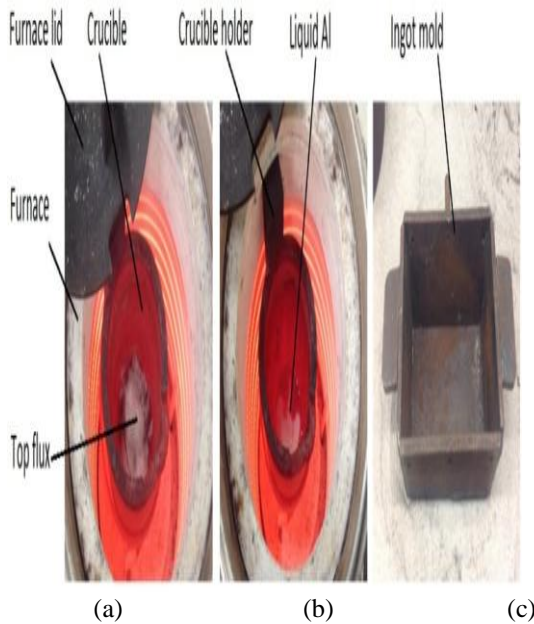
(a) melt mixture of the flux and chips; (b) recovered Al in the crucible; (c) ingot mold.
